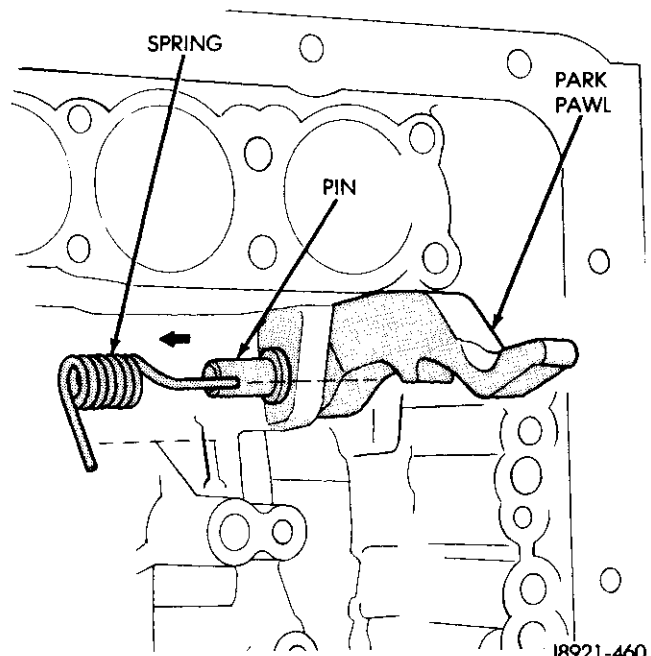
Removing/Installing Park Pawl-Pin-Spring
